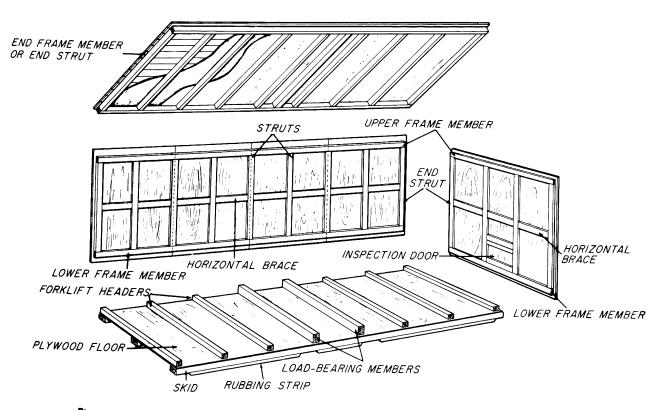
Exploded view of a plywood-sheathed crate to be assembled with nails.
